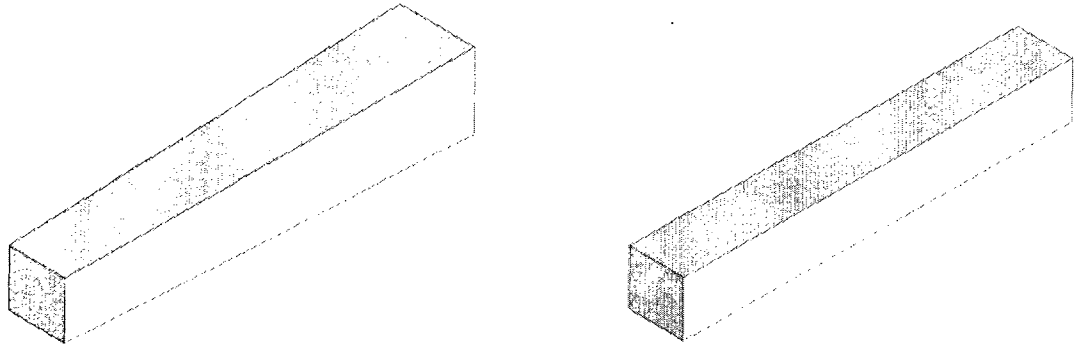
SolidWorks Model of Central Mold Piece. Final Design Shown on Right
